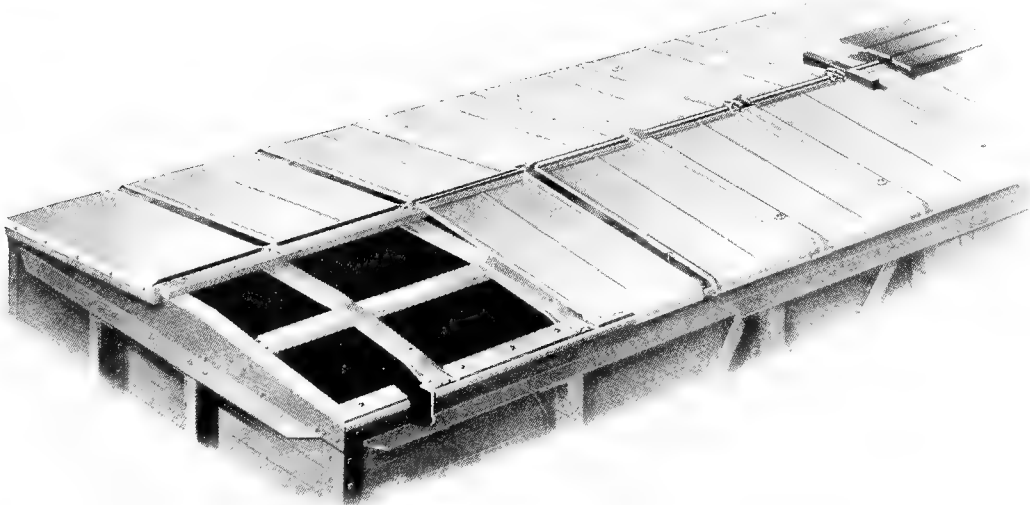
Hutchins All-Steel Steel Carline Roof Applied to Steel Frame Car. Hutchins Car Roofing Company.
